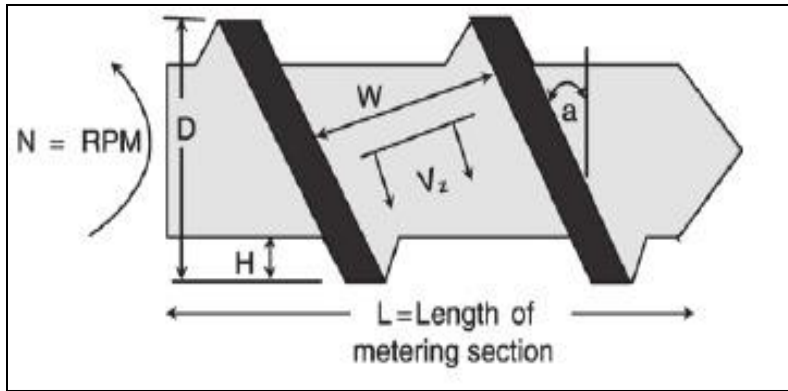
Single Screw Extruder Dimensions (Giles, Wagner and Mount 2005)
